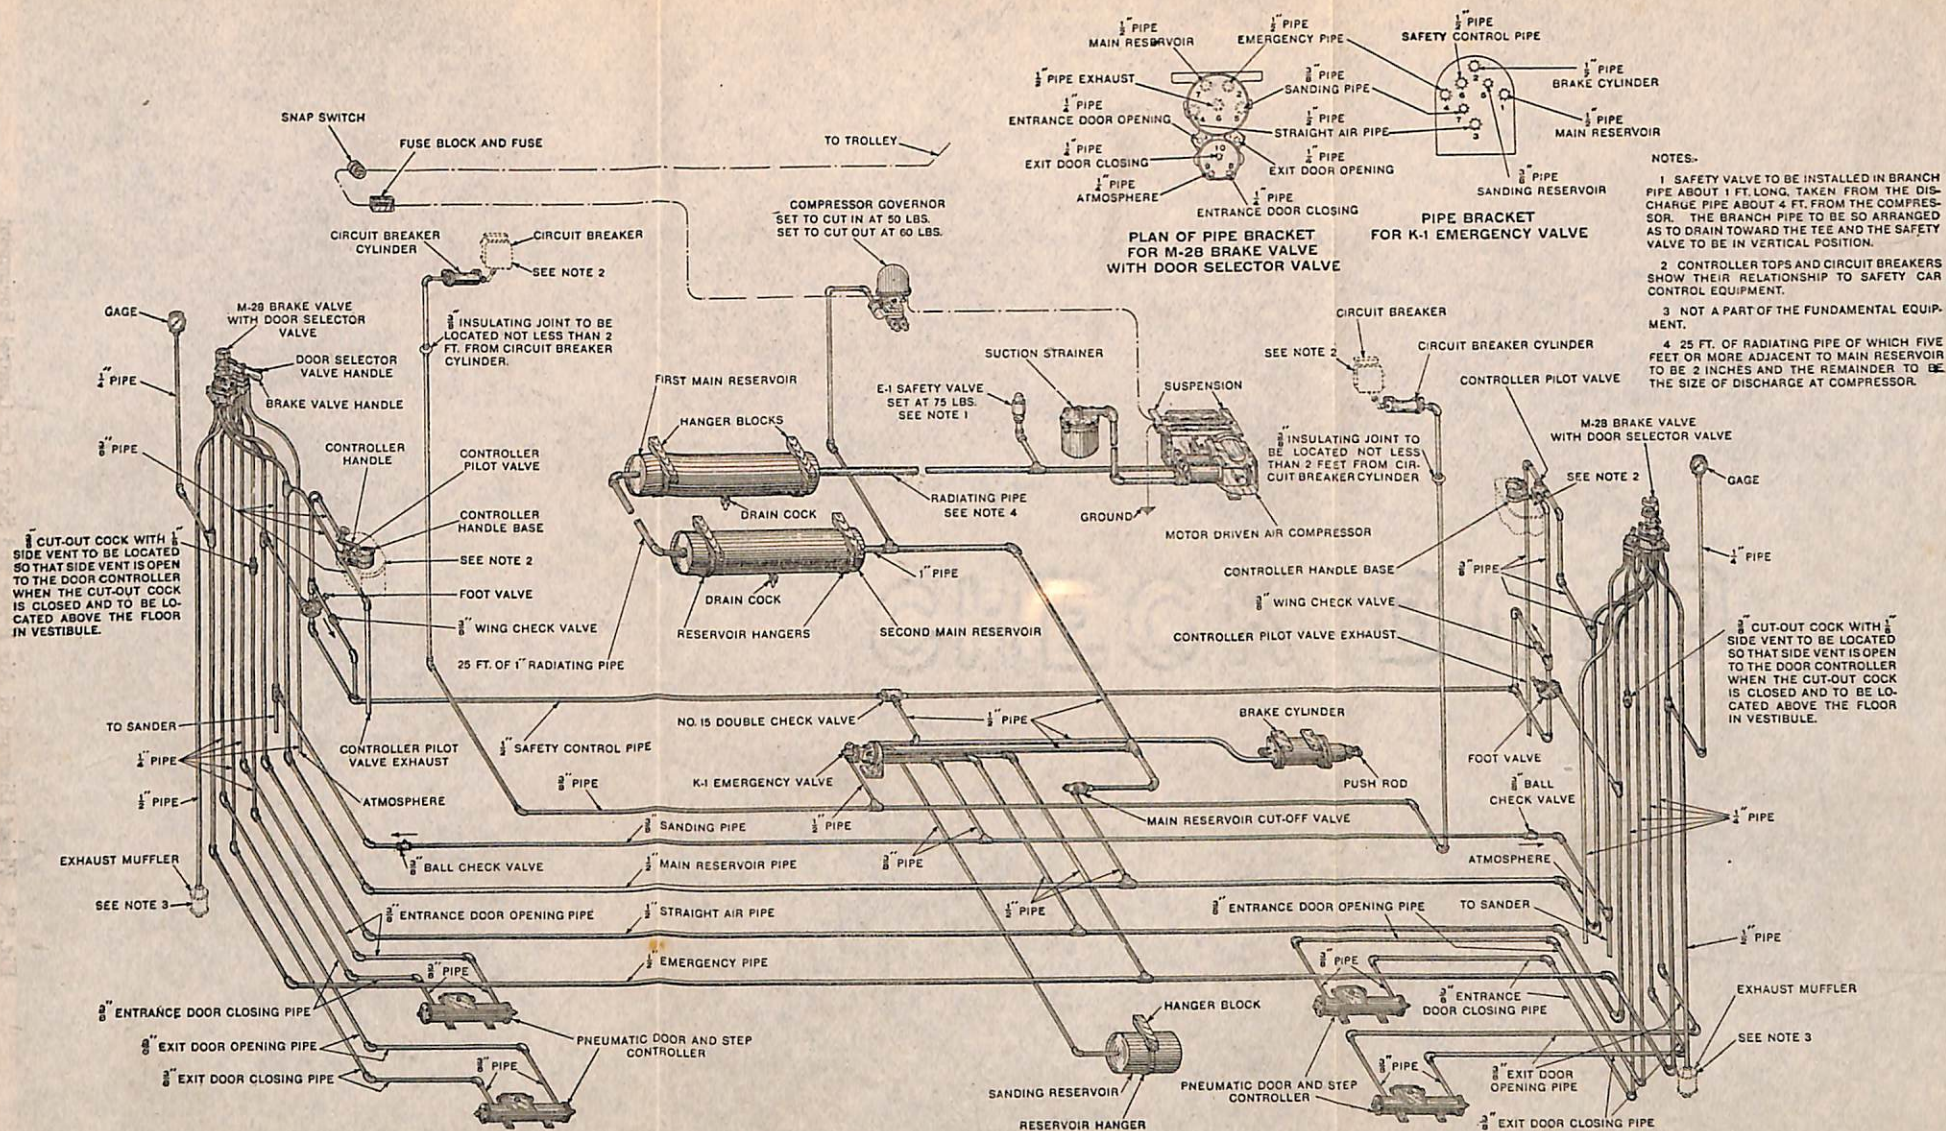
Piping Diagram of Air Brake and Safety Car Control Equipment with M-28 Brake Valve having Selector Valve
